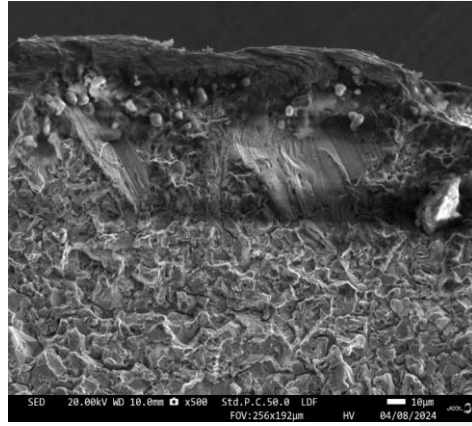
Fracture surface bolt A, at edge, intergranular cracking.
